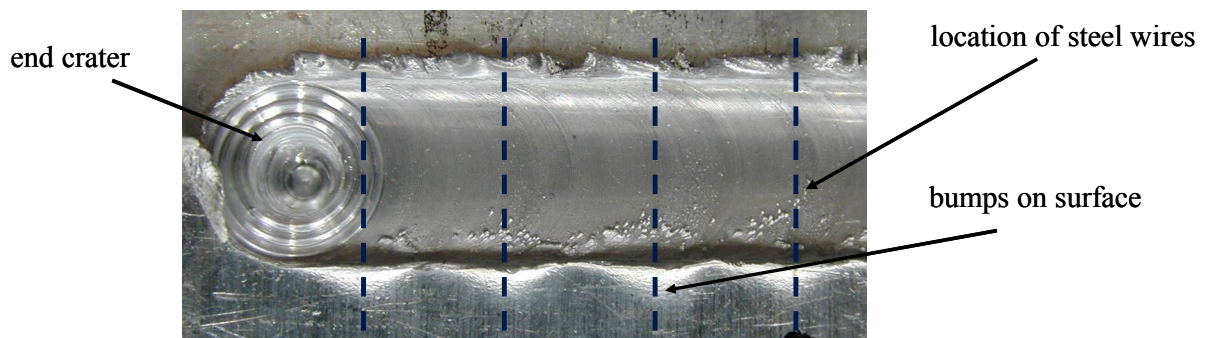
Top view on FSW weld seam of reinforced aluminium alloy
